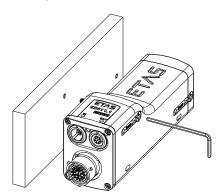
Attaching a Module to Other Components with the Integrated Assembly Elements
